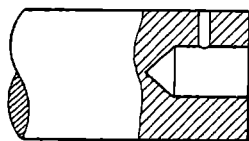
Large-section blank machined in order to be welded on a machine of insufficient rating
